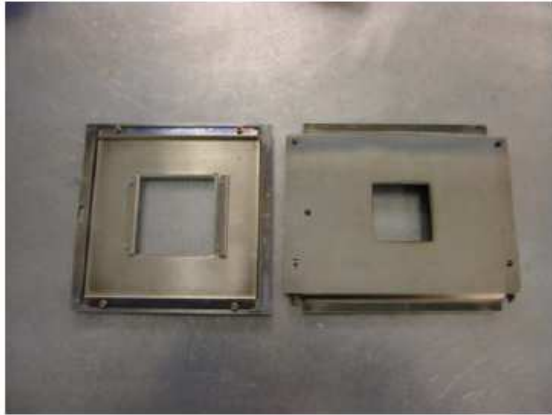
A sample holder (left) and a mask holder (right) [40].
